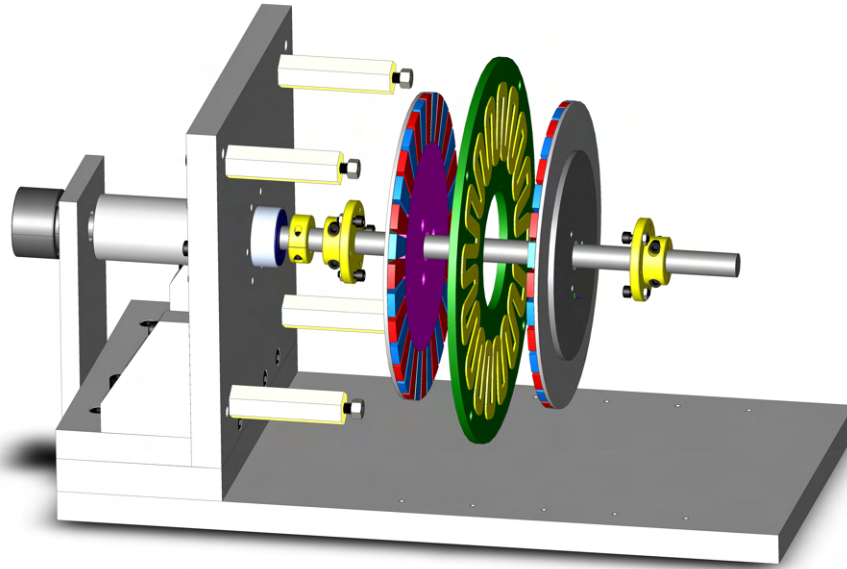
Exploded view of the computer-aided design (CAD) model for the proposed dual rotor AFPM machine on a testing fixture. The machine is shown with a conceptual wave winding PCB stator.
